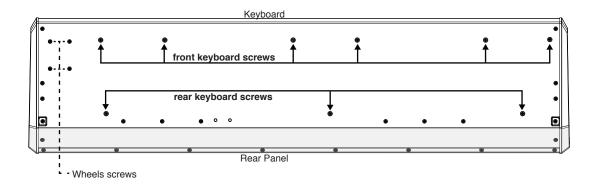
Wheels Assembly and Keyboard Assembly hardware locations
